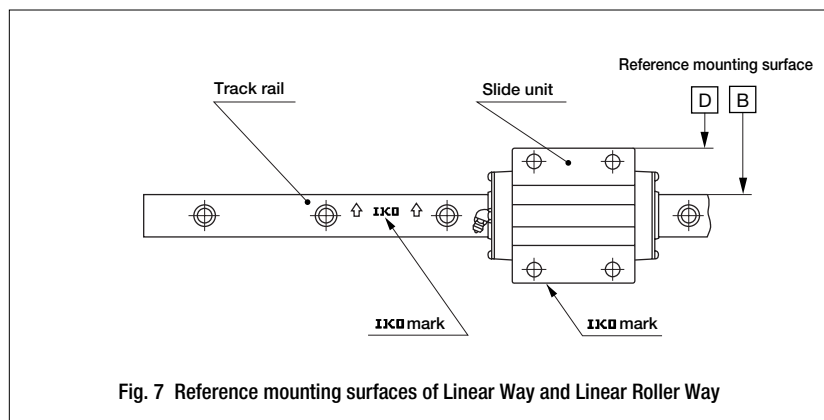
Reference mounting surfaces of Linear Way and Linear Roller Way
